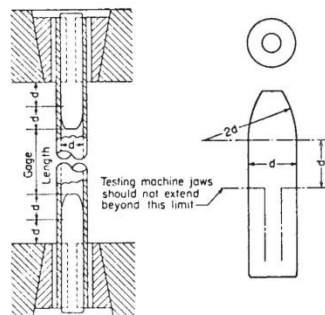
Metal Plugs for Testing Tubular Specimens, Proper Location of Plugs in Specimen and of Specimen in Heads of Testing Machine
